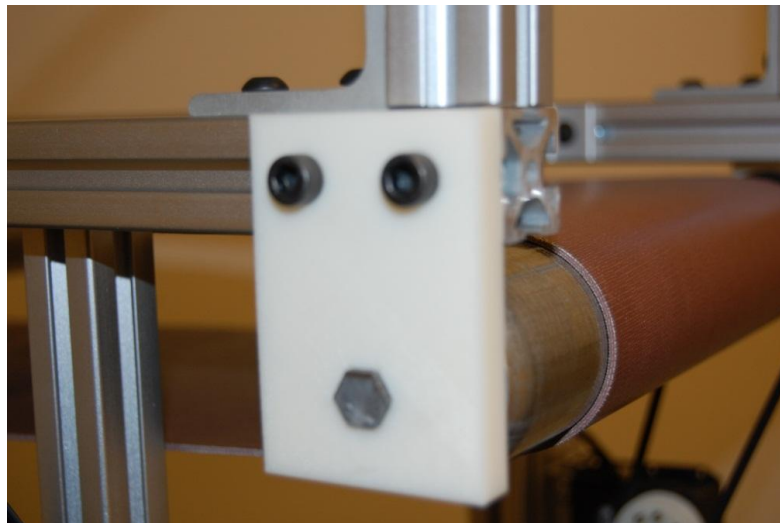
pr2\_playpen\_roller\_fastener.sldprt
